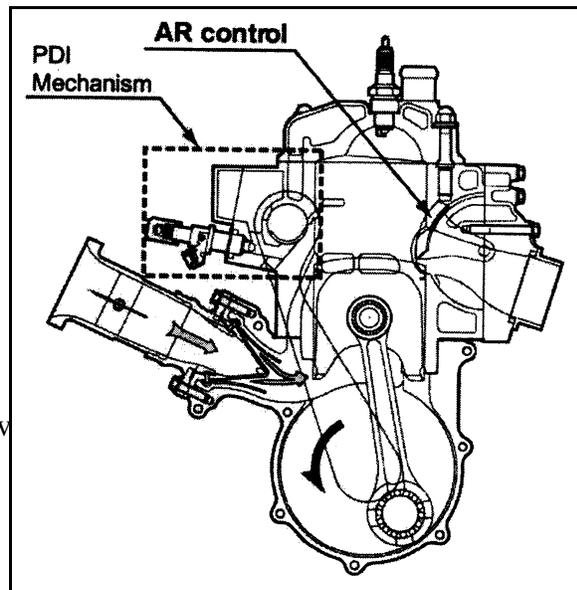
Cut-away of the Honda Active Radical Two-Stroke Cycle Engine (The AR control is a valve that moves to retain residual exhaust gases; the PDI Mechanism is the direct in-cylinder fuel injection system.)
